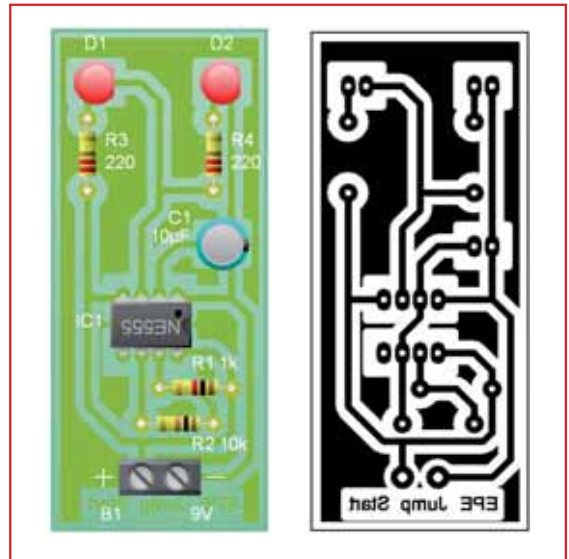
Rectangular Crazy Eyes component layout and PCB artwork
